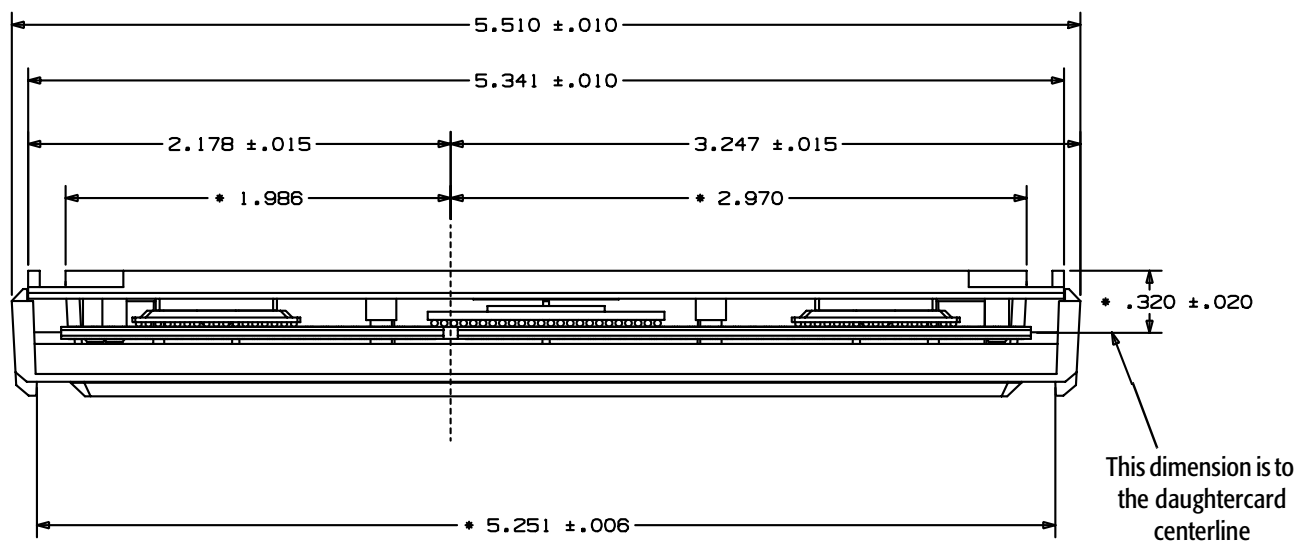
AMD Athlon™ Processor Module Dimensions—Edge View
